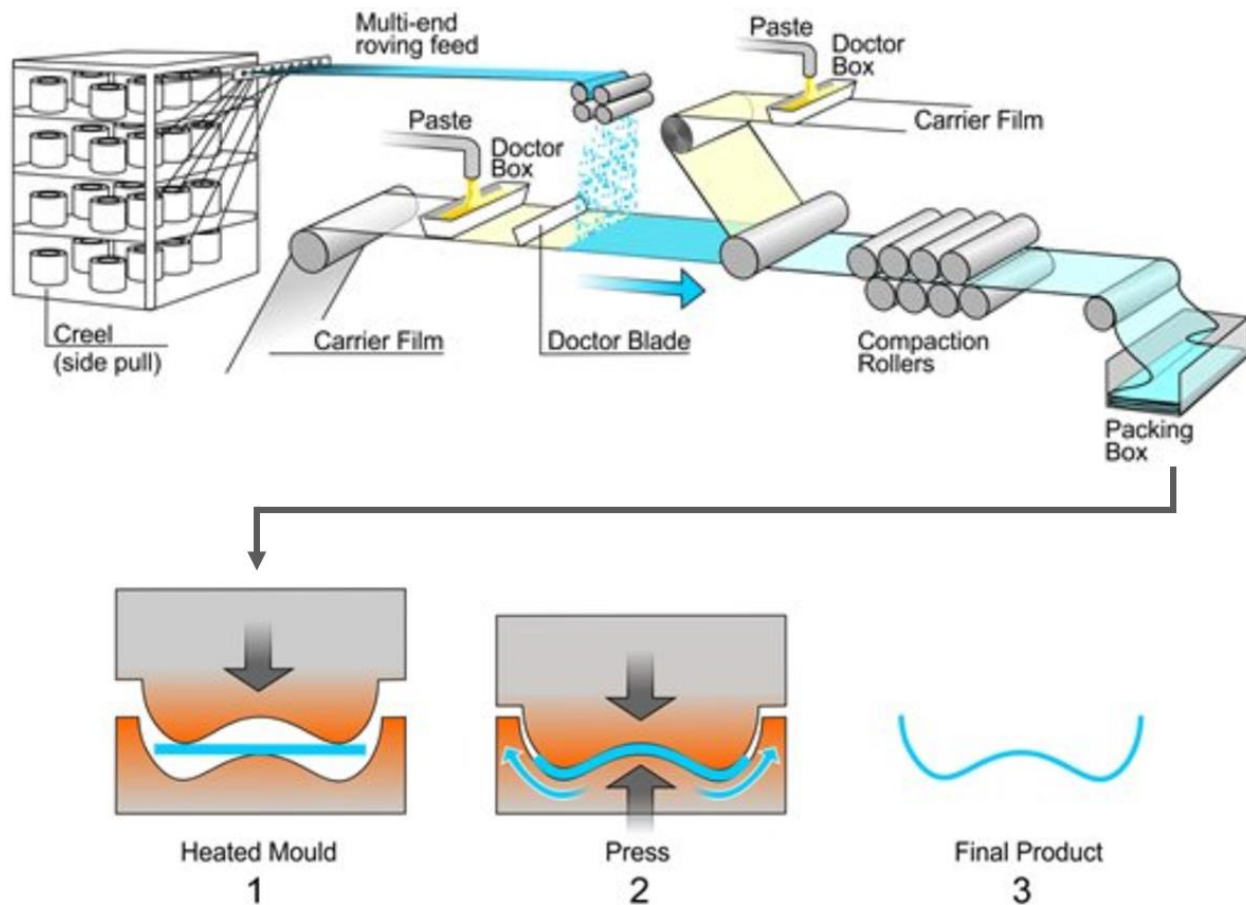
SMC material manufacturing process and hot compression moulding [13]
